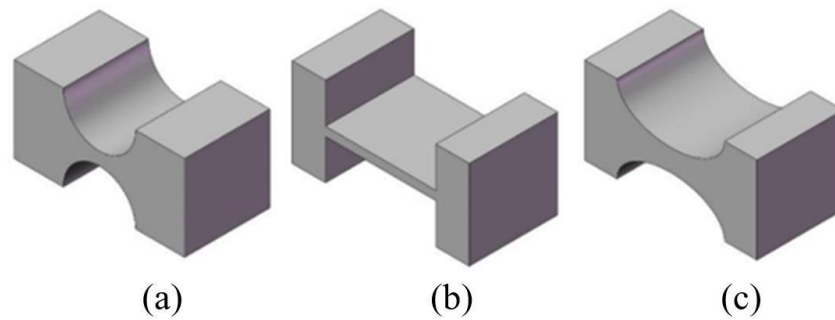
Three common notched flexure hinges: (a) Straight-circular flexure hinge; (b) Straight-beam flexure hinge; (c) Elliptical flexure hinge.
